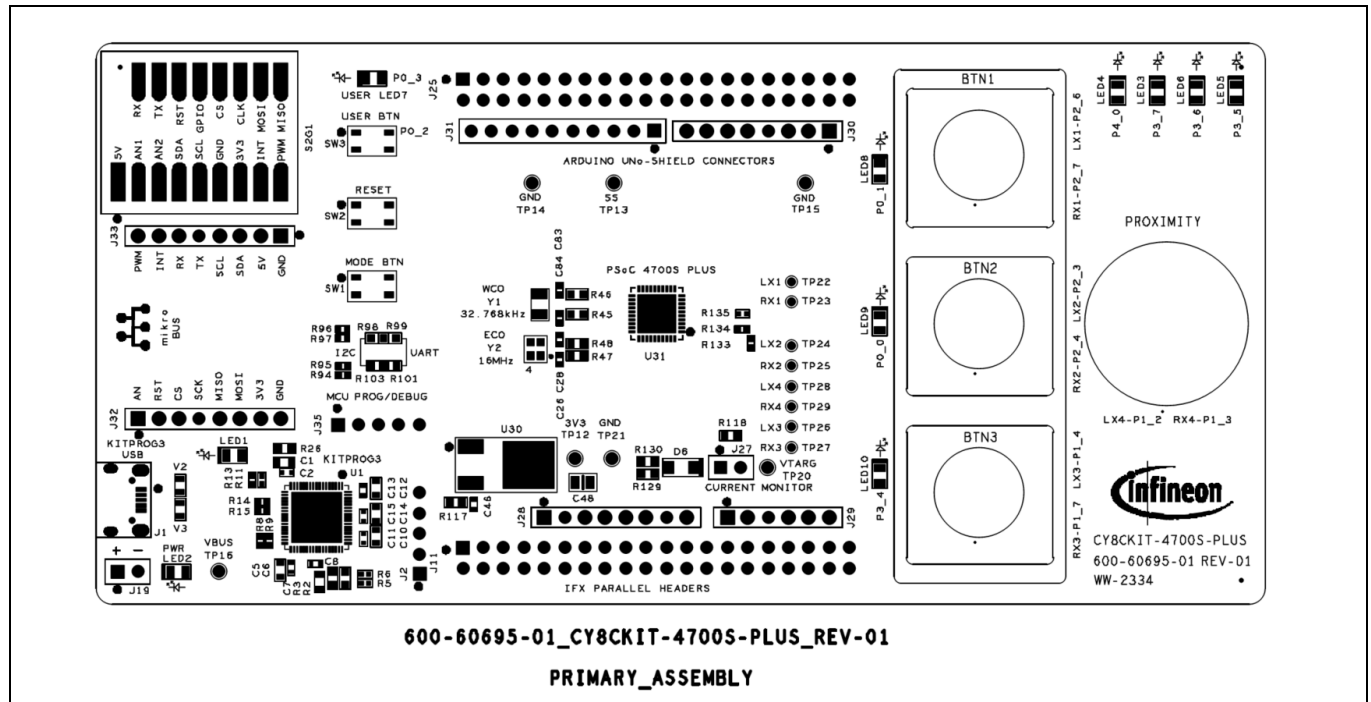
CY8CKIT-4700S-PLUS kit assembly drawing (top view)
